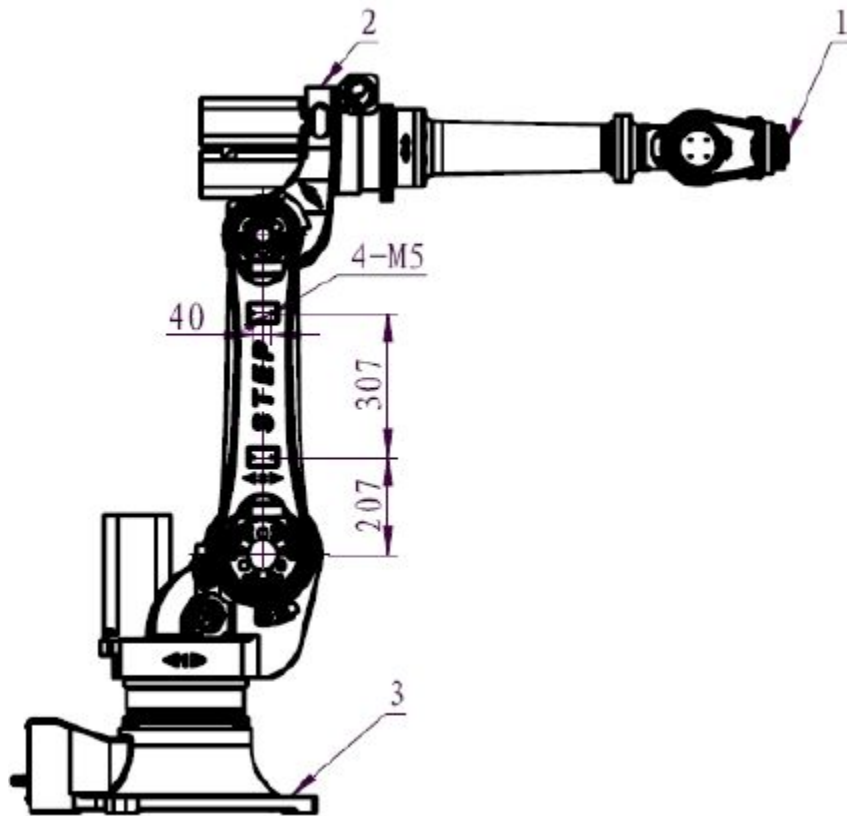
Upper Arm Auxiliary Mounting Hole Dimensions of SR25
